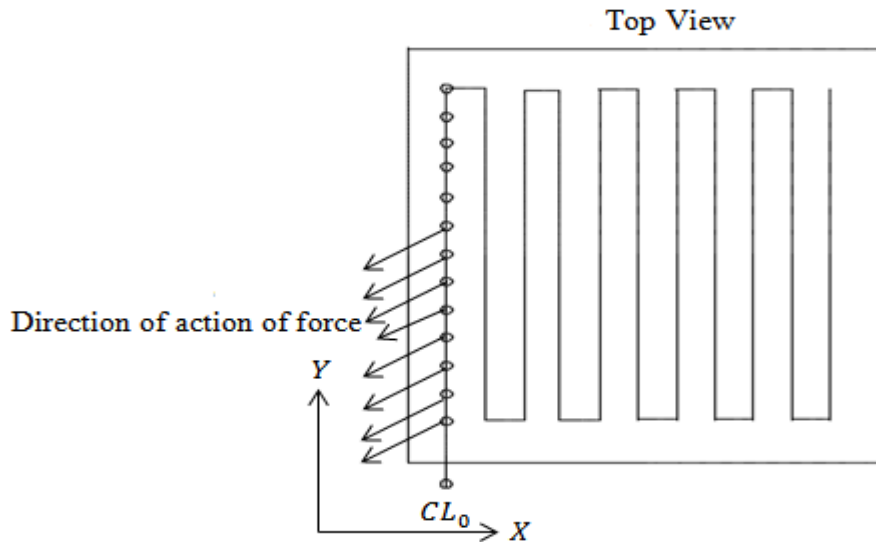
Demonstration of different views of movement of spherical milling cutter on any toolpath showing the direction of action of force
